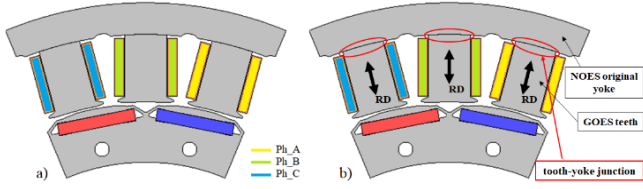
Stator tooth segmentation: a) NOES reference motor, b) GOES teeth motor
